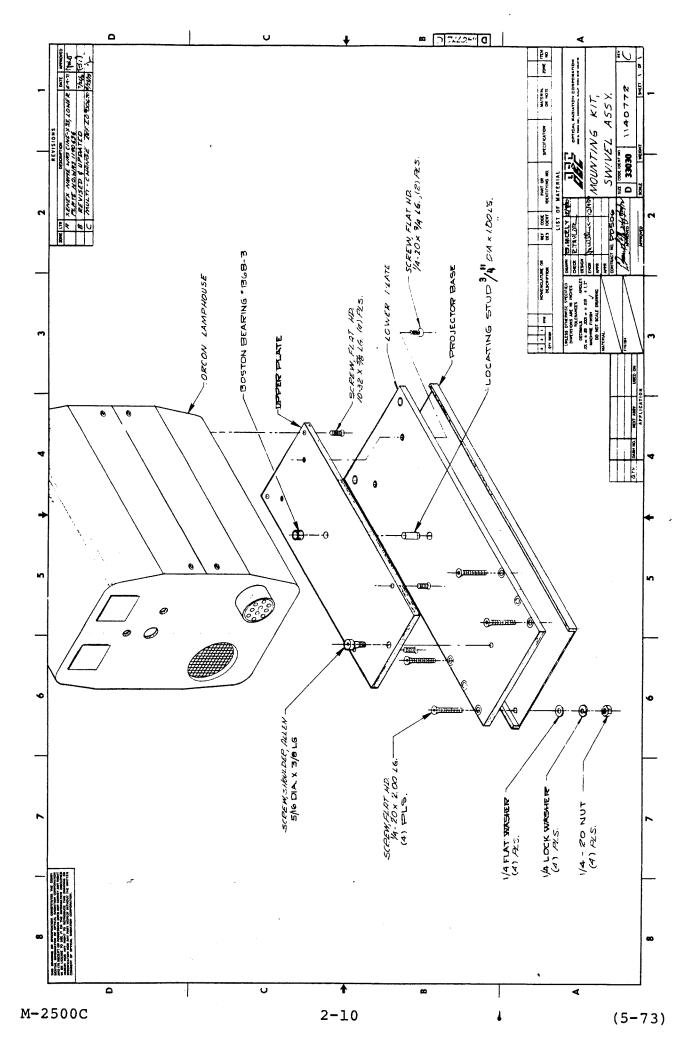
35mm Mounting Kit Swivel Assembly
